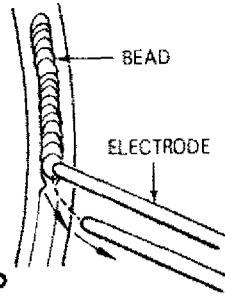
Burn-through resulting from excessive current flow when drag-welding the root bead.
